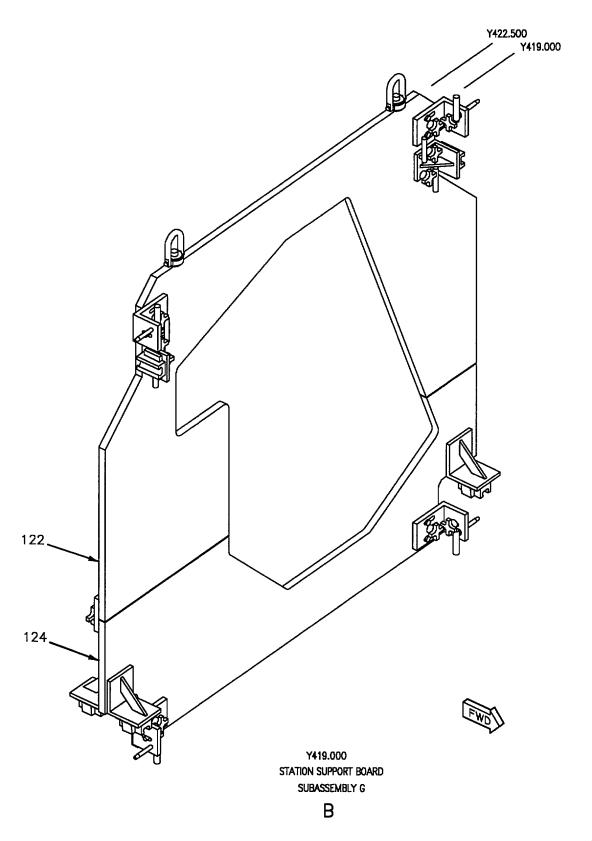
Engine Air Inlet Maintenance Fixture; RE174322020-2 RH (Sheet 3)
